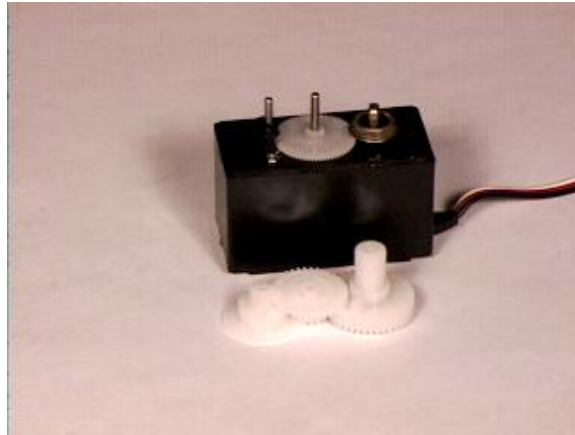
Open Servomotor Adjacent to Removed Gear Train
